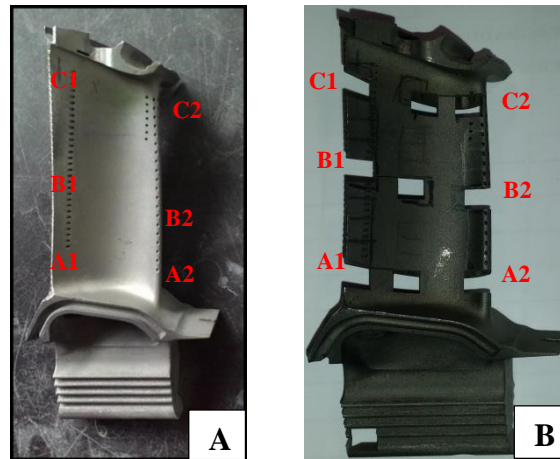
Turbine blade sample at different points (A) Before machining; (B) After machining.
